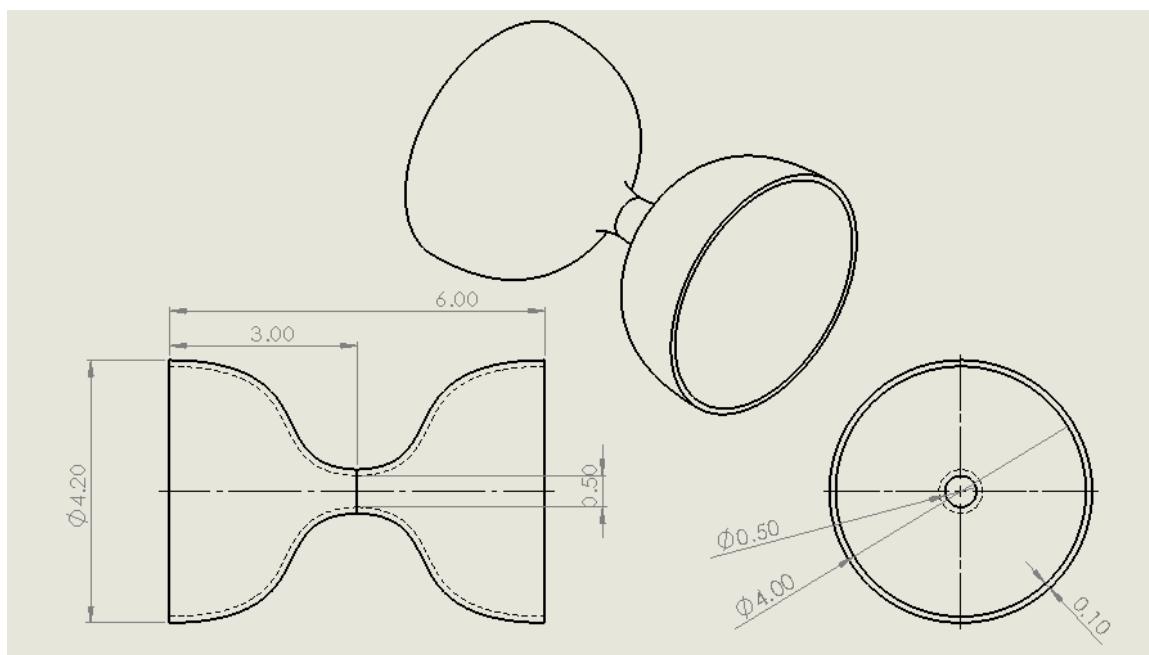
Solidworks Drawing of Model One-3(unit - inch)
